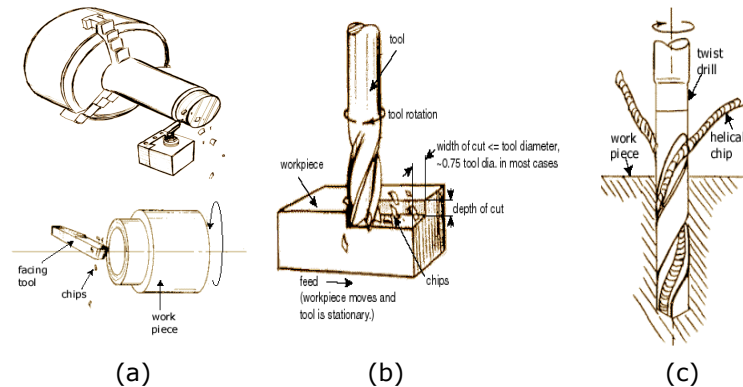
Principal machining operations. (a) turning. (b) milling. (c) drilling [4].
